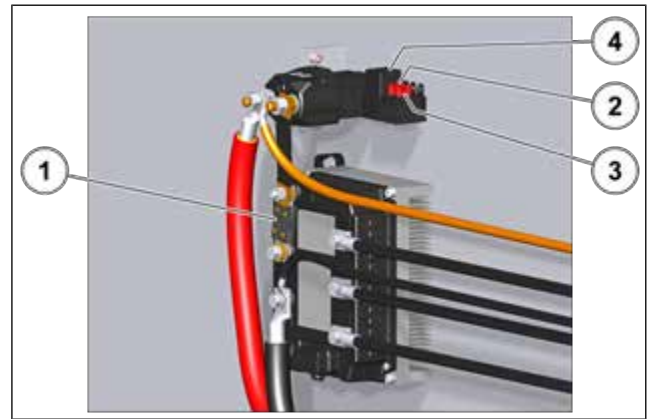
Replacement of the electric pump motor drive fuses and relays - up to machine no. MAN00000J01101633
